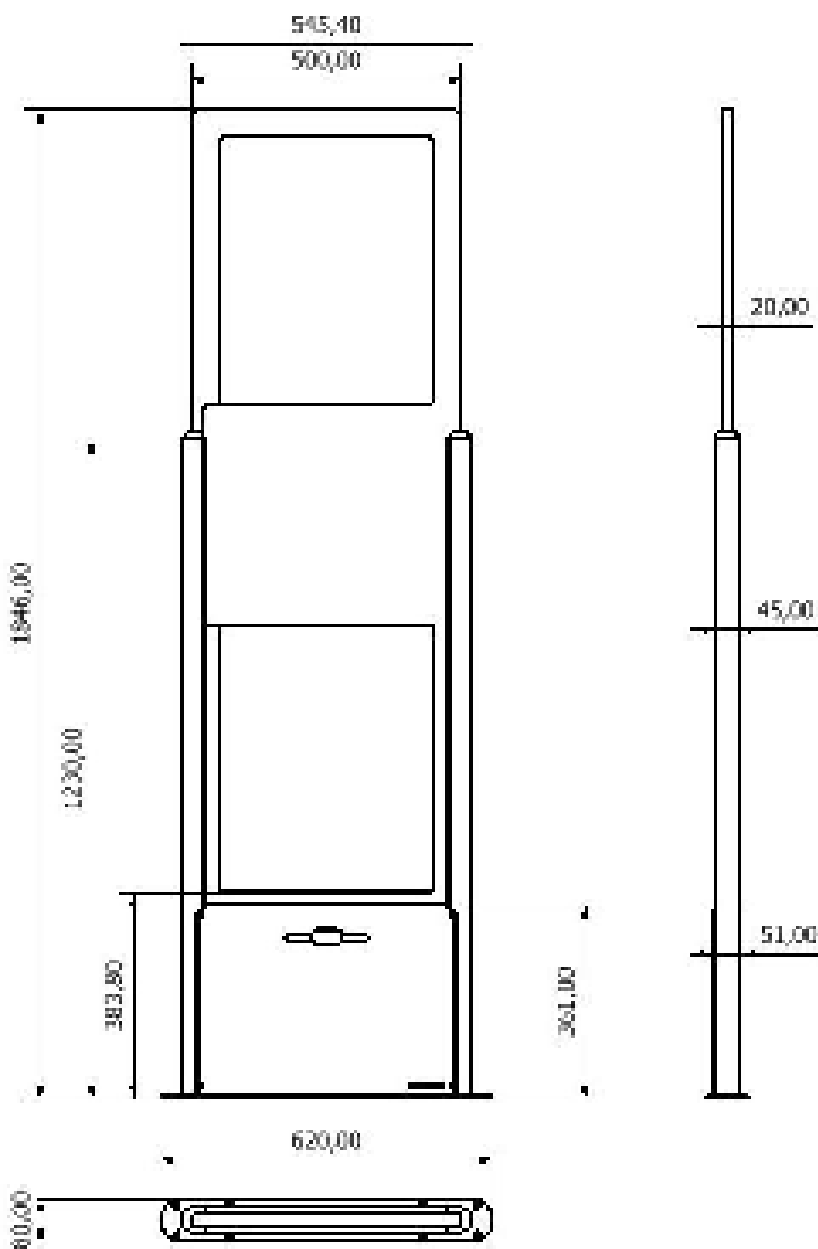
Outer Dimensions of LSP3A-LR Clear Panel
